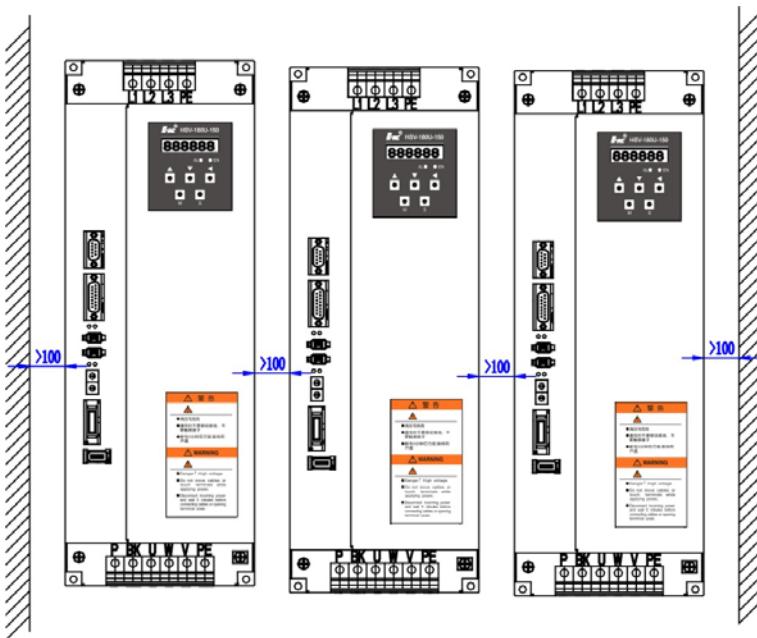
Installation space interval for HSV-180US-100, 150 spindle drivers
